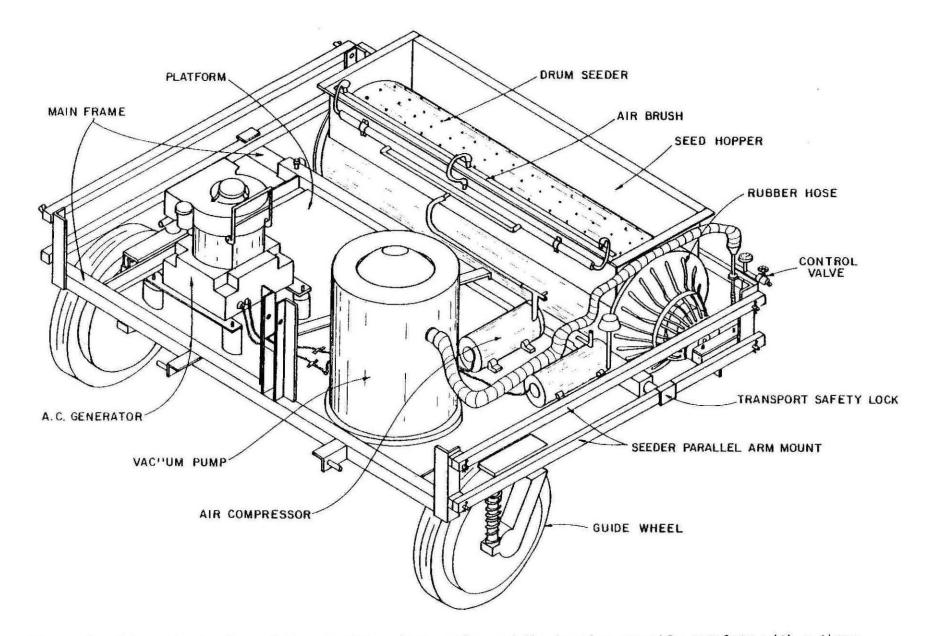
Schematic drawing of the precision drum seeder and the housing assembly complete with a three point hitch attachment.
